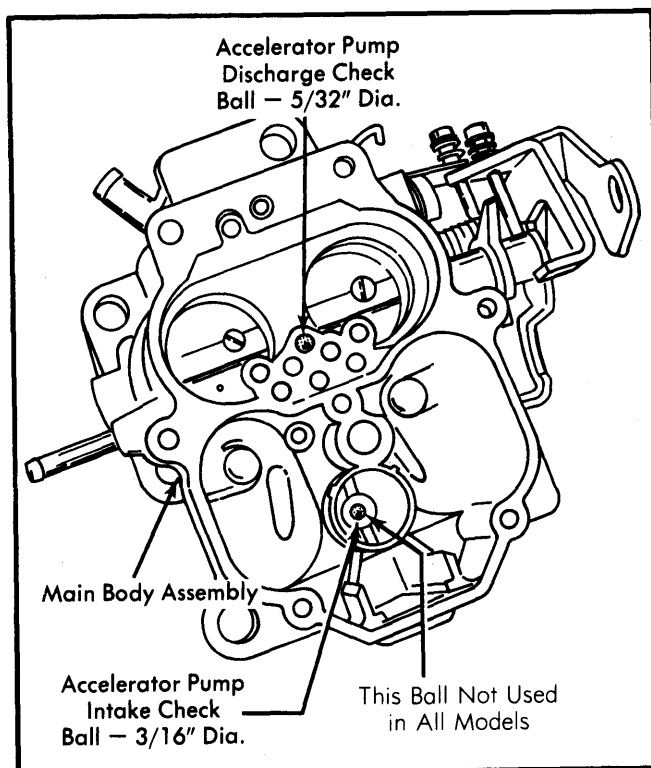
View of Main Body Showing Locations of Large and Small Check Balls
